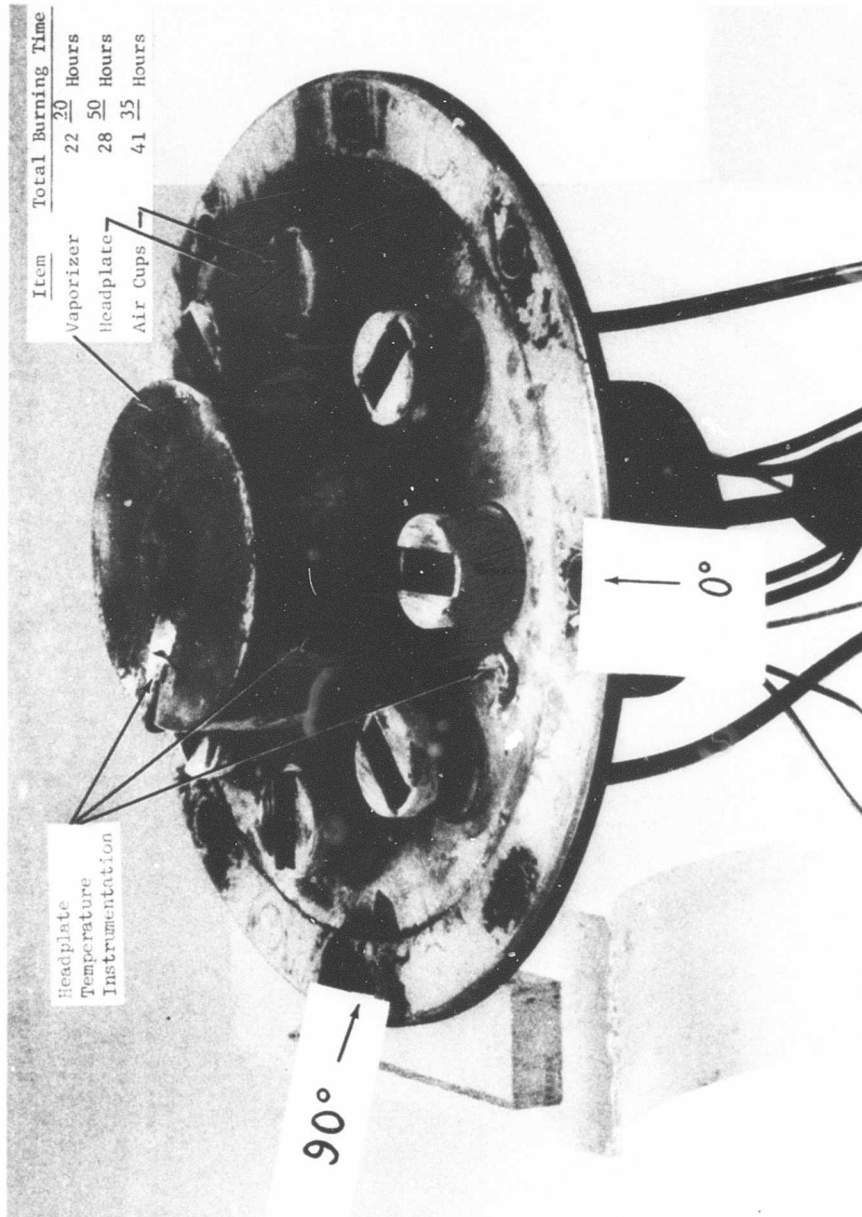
Post-Test Photograph of Annular Vaporizer Headplate Assembly.
